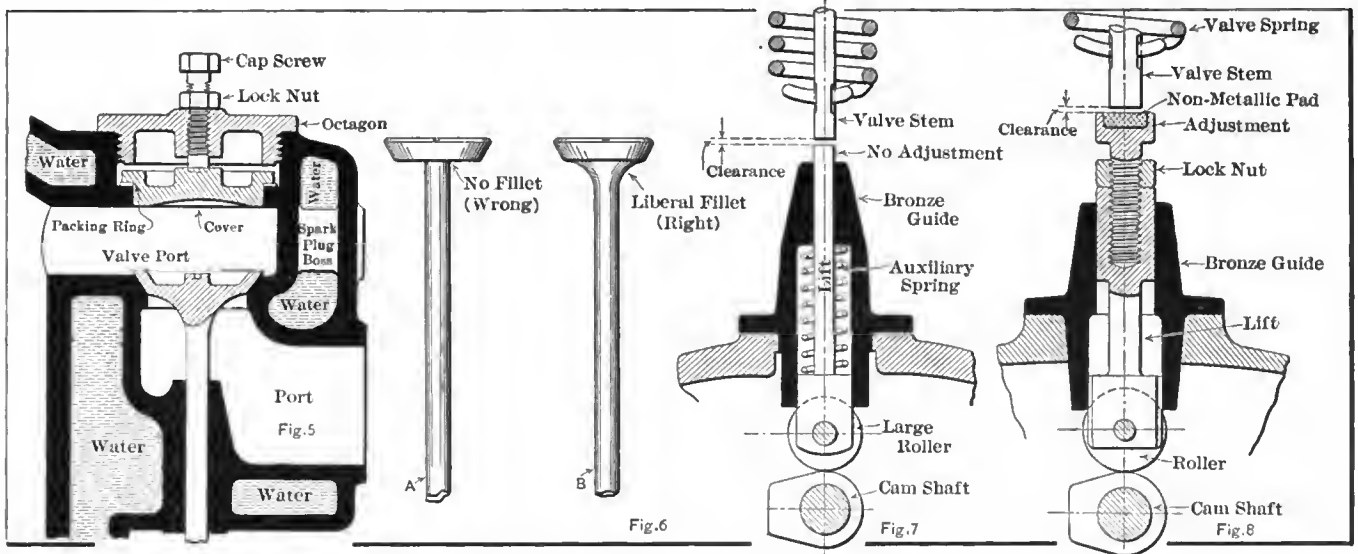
One method of retaining valve cover in place from above. Fig. 6—Right and wrong way of constructing valves. Fig. 7—Valve construction in which no adjustment is provided for wear, as contrasted with Fig. 8—Proper form of construction with adjustment
